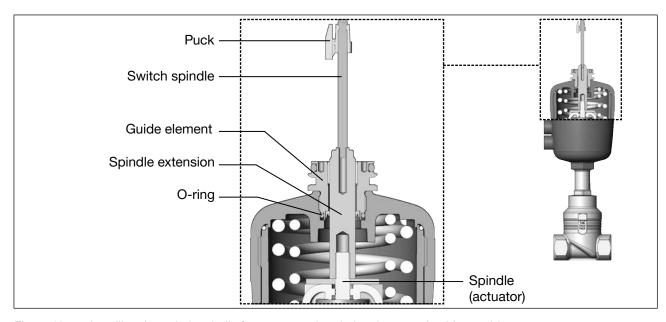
Installing the switch spindle for process valves belonging to series 26xx and 27xx
